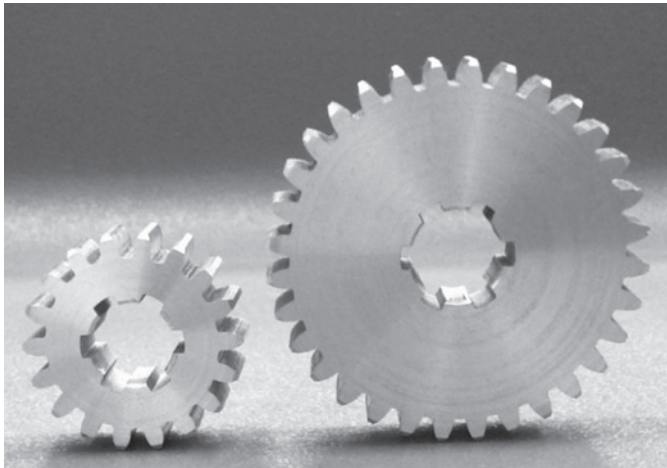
View of straight-tooth samples used for the tests – gears no. 1 (Tab. 1)
